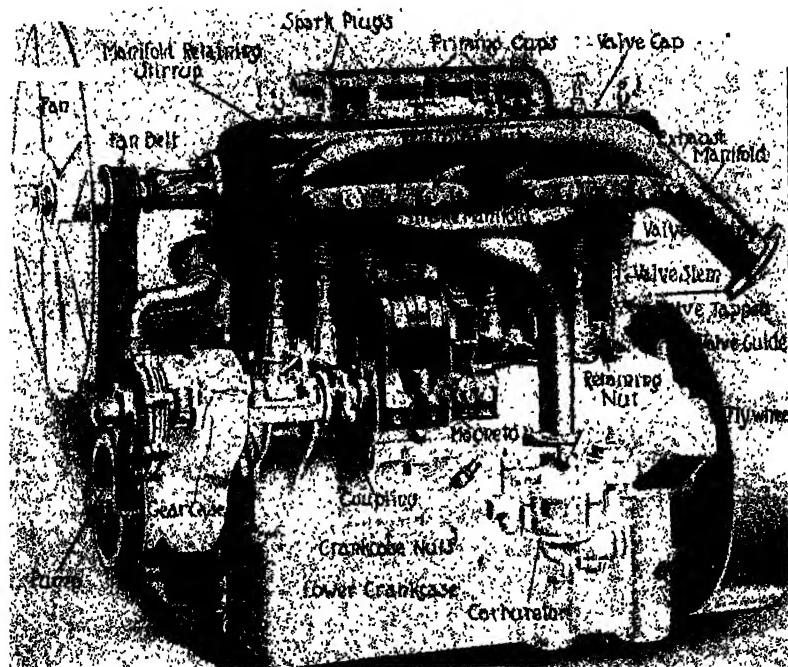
View of Typical Four Cylinder Automobile Power Plant.
